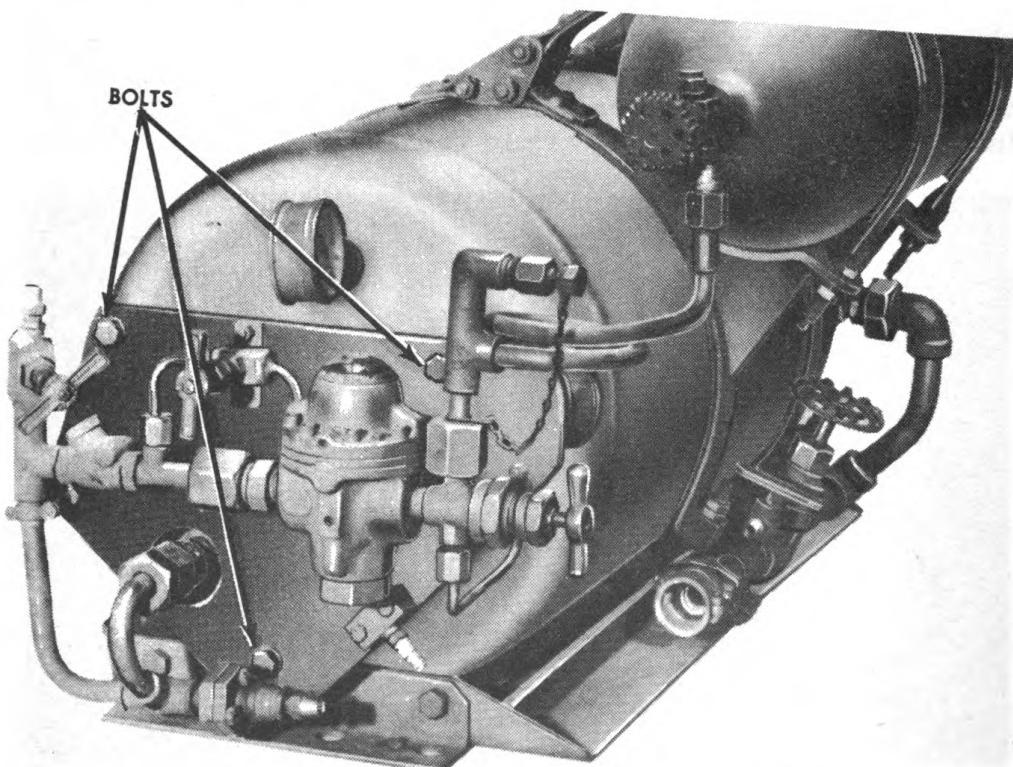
Pressure line plate bolted on three bosses of fuel container of sponson fuel group.
